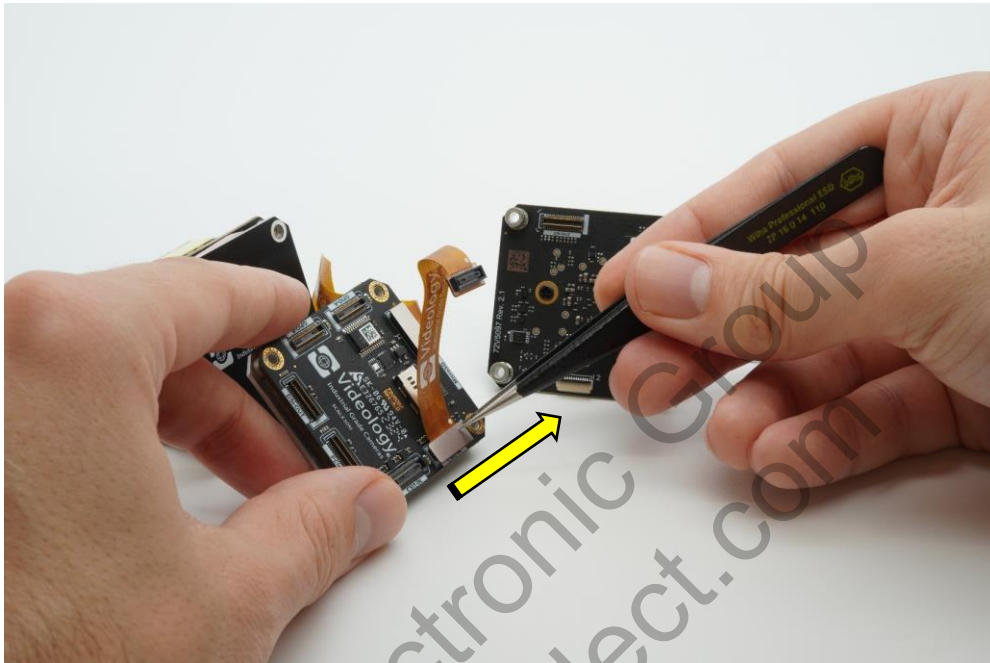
Detach SCAILX-FLEX-60 from SOM PCB
